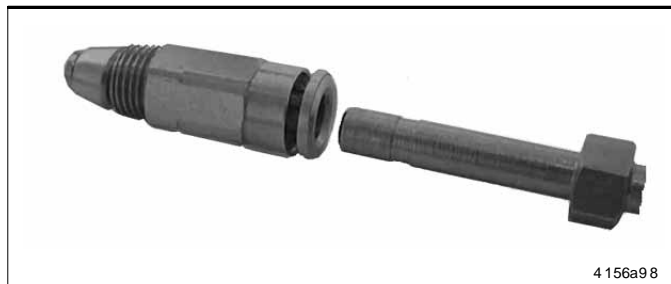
Check valve with reinforced collets and high-pressure hose
